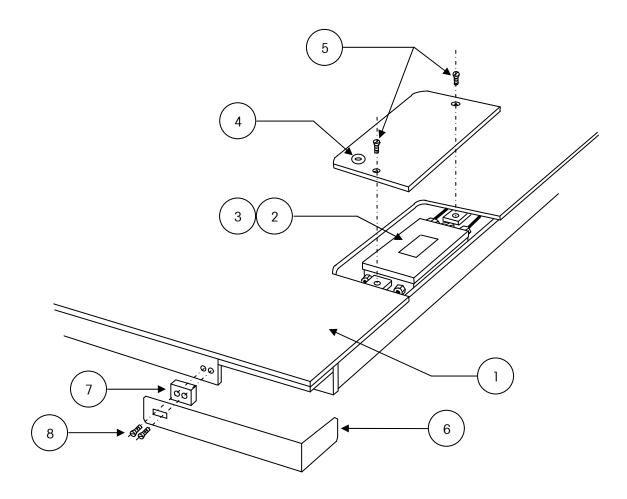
Platform and Junction Box Assembly (22564XXXXX-A)
